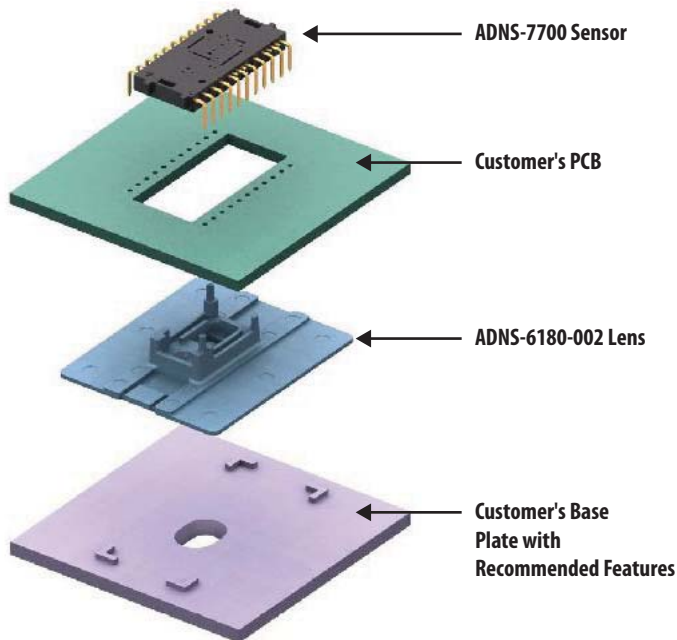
Exploded view drawing of ADNS-7700 sensor coupled with ADNS-6180-002 lens, PCB & base plate
